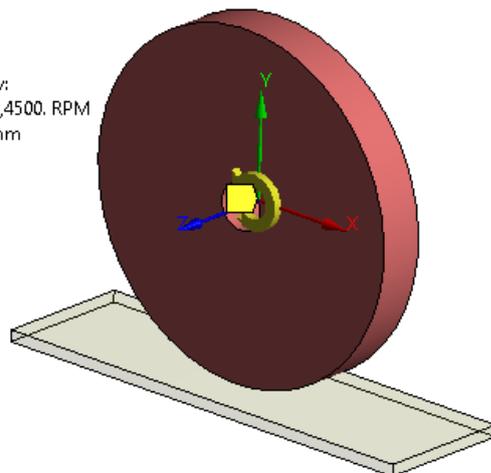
Boundary Condition on Steel Plate Grinding Fig. 11 Boundary Condition on Aluminium Plate Grinding
